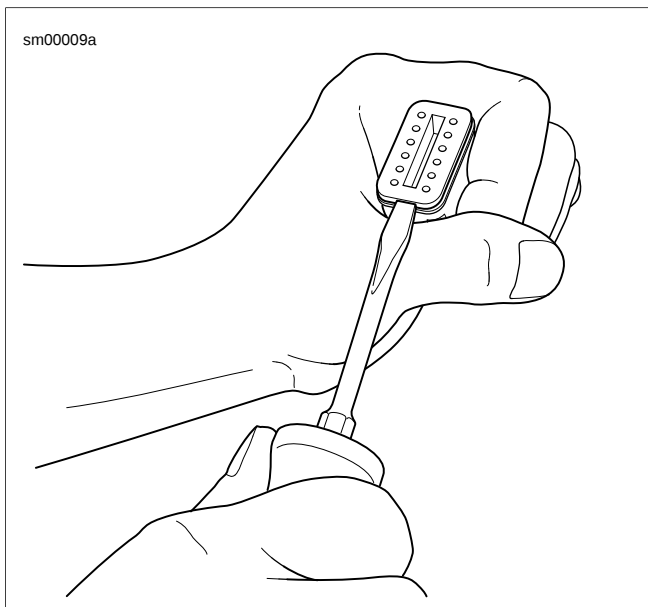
Deutsch DT Sealed Connector: Remove Secondary Locking Wedge
